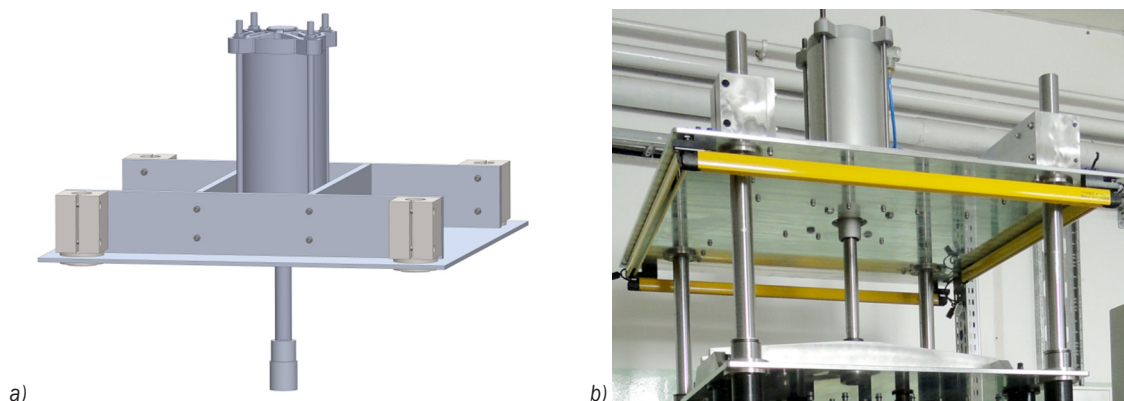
a) Load assembly model, and b) location of the top plate with light curtains
